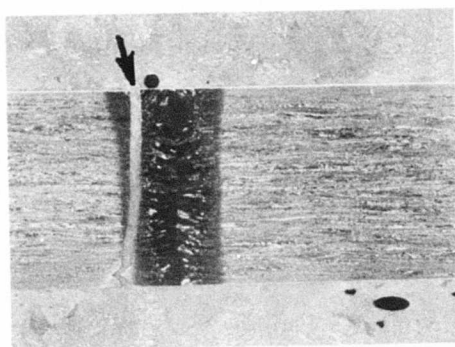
WELD CROSS SECTIONS (TITANIUM ALLOY SPECIMENS)
